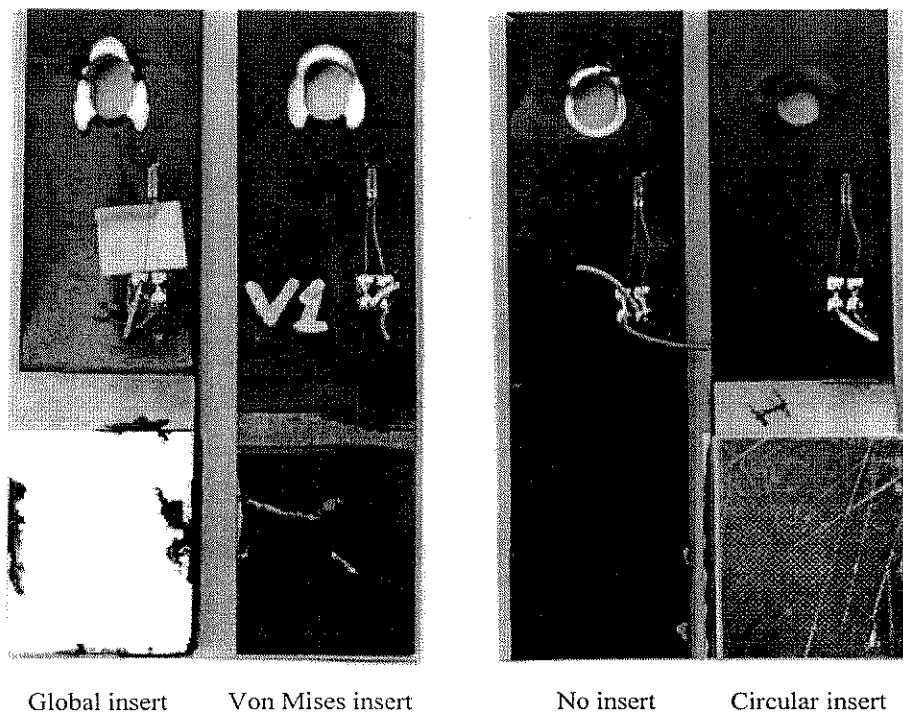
Typical failed test specimen for all joint configurations (pin-loaded)
